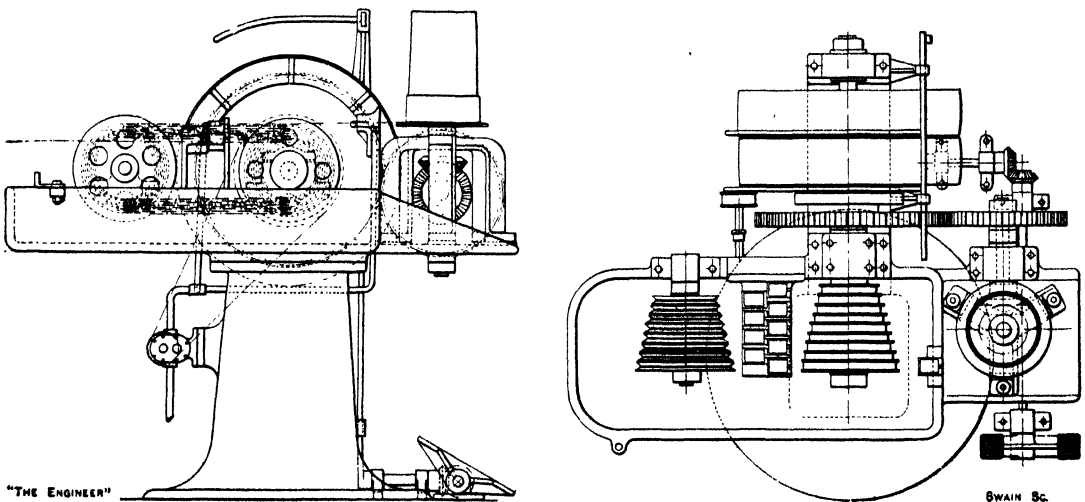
CONTINUOUS WIRE-DRAWING MACHINE—DAVID BRIDGE.
